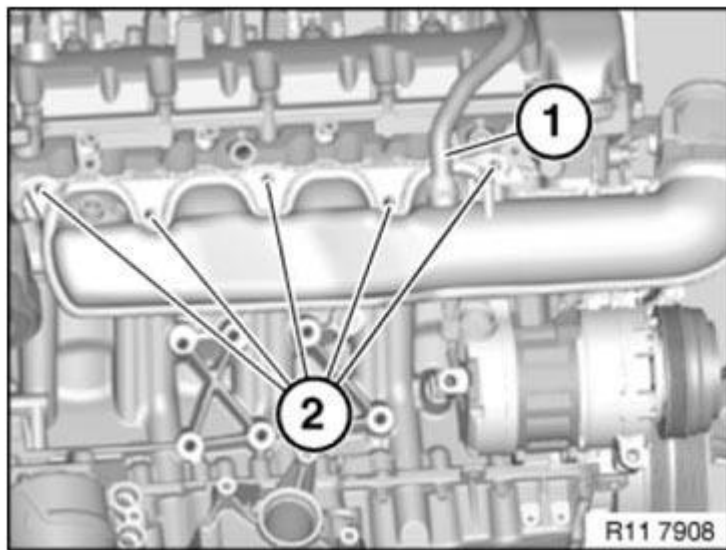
Identifying Engine Ventilation Hose And Nuts
